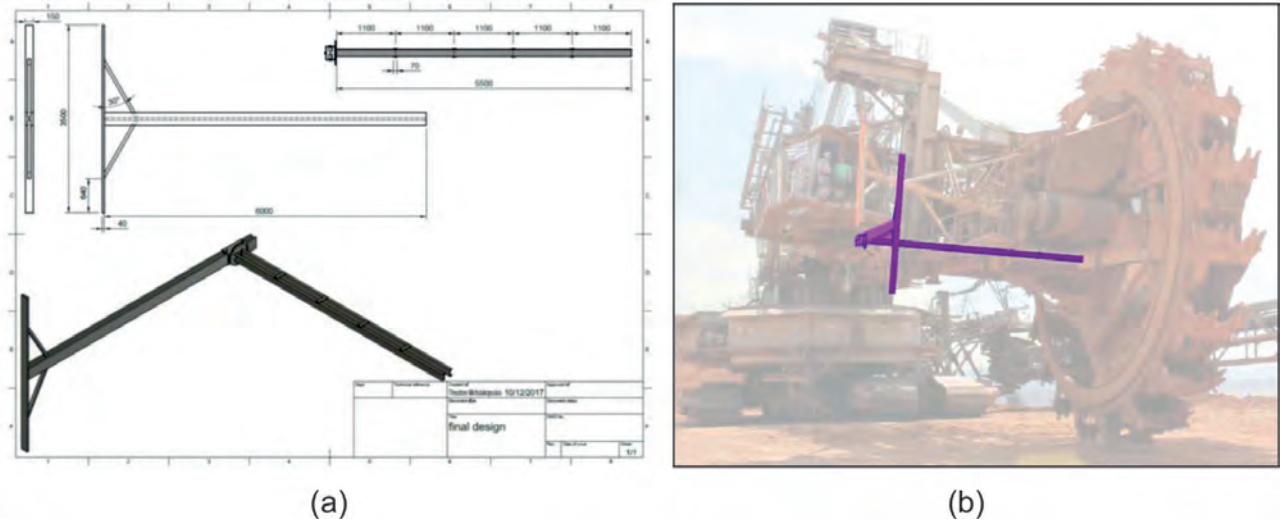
Initial designs of the mounting mock-up (a) and installation system on BWE (b)
